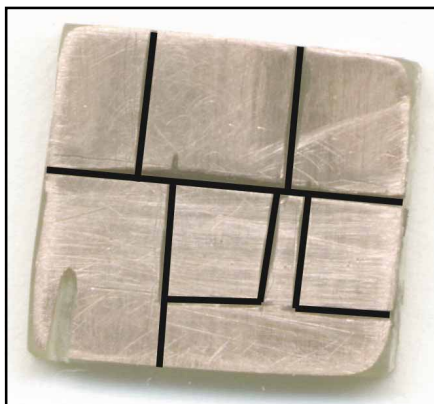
I made the pad-isolating cuts in this small PC board with my Dremel hobby tool.
